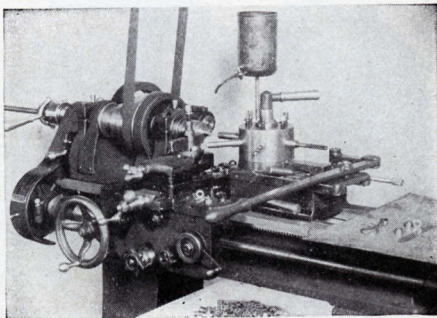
Screw cutting lathe fitted with a hand lever turret for machining small gear blanks.
